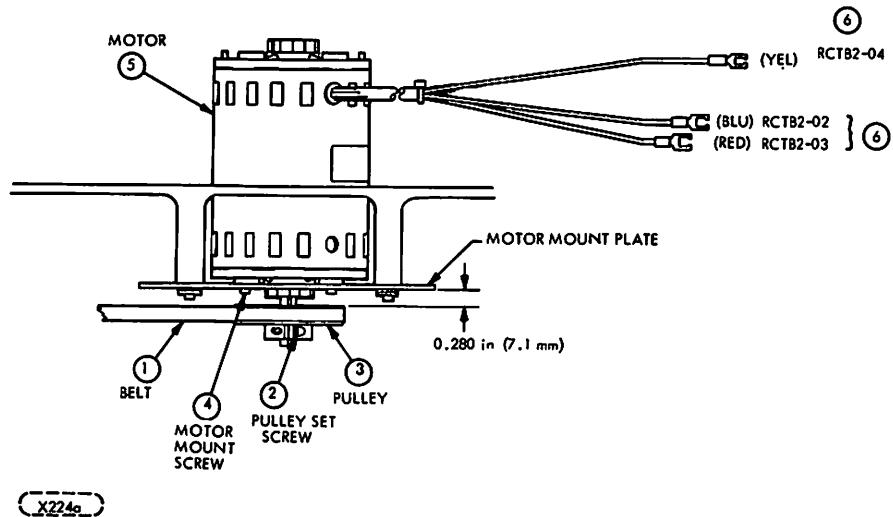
DRIVE MOTOR ASSEMBLY
